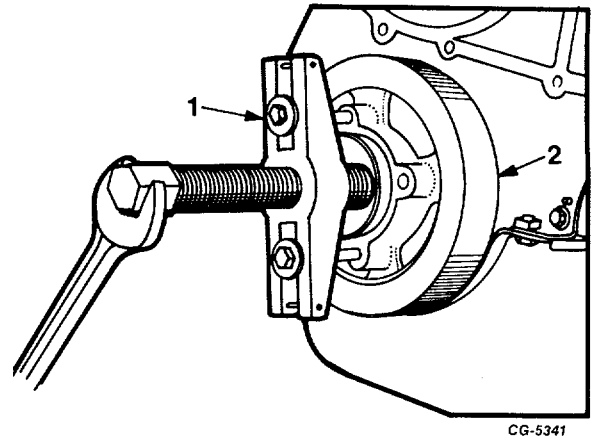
Using SE-1368 Puller to Pull Crankshaft Damper
